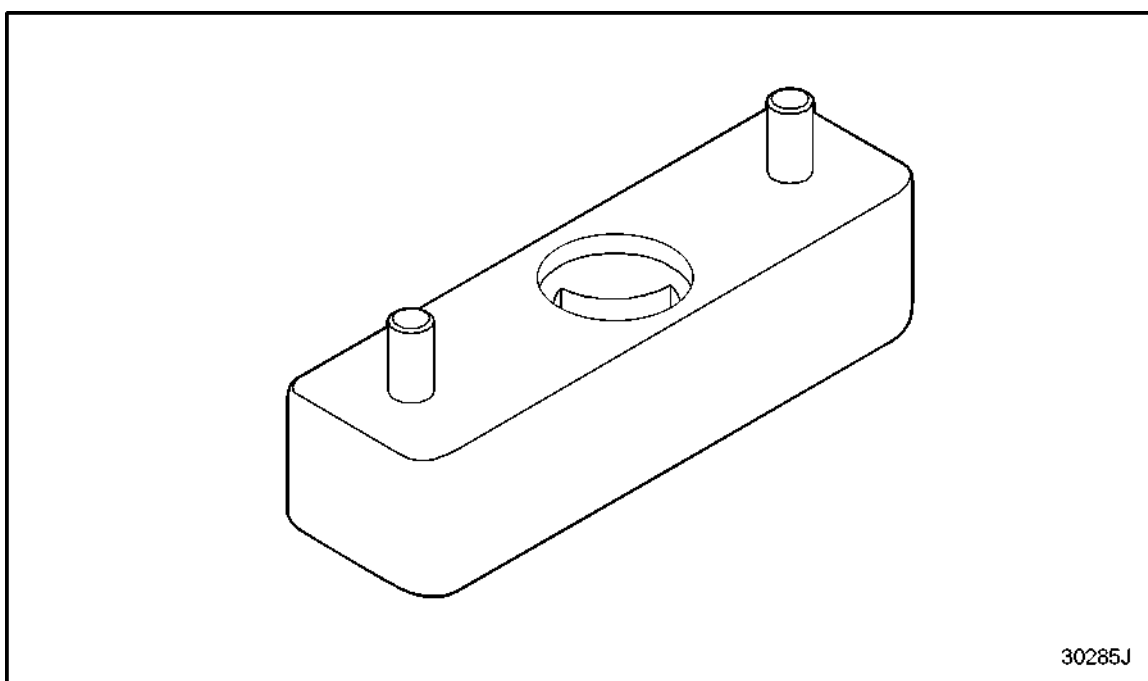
Impeller Slip Test Adaptor J 33765
